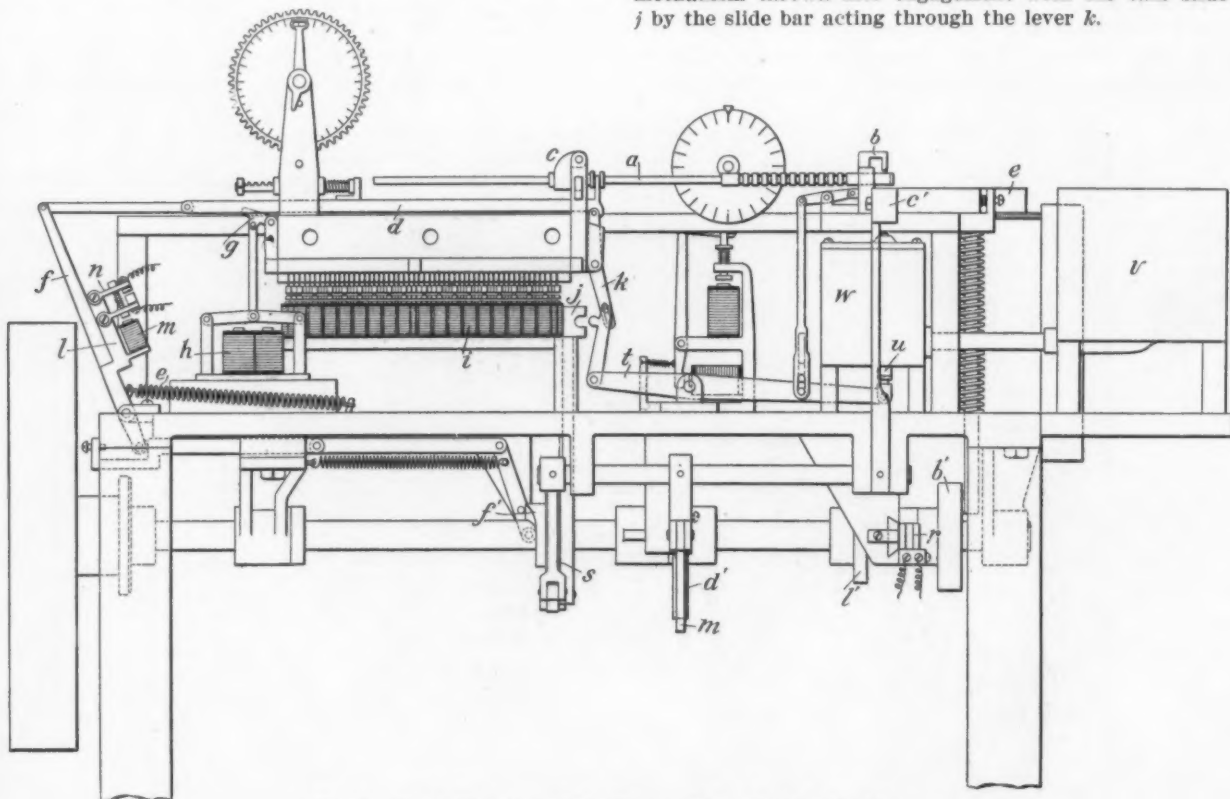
Front Elevation of the Pearson Type Casting Machine.
